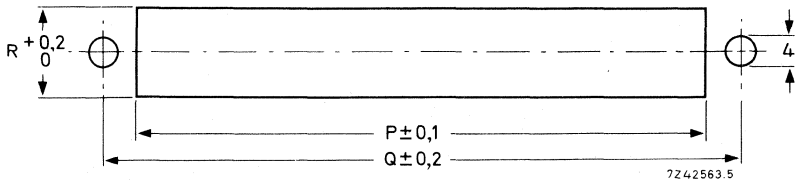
Piercing diagram for panel mounting; see Table 3 for dimensions P, Q and R. If bracket 4332 026 04630 and end piece 4332 026 04770 are used the circular holes are superfluous.
